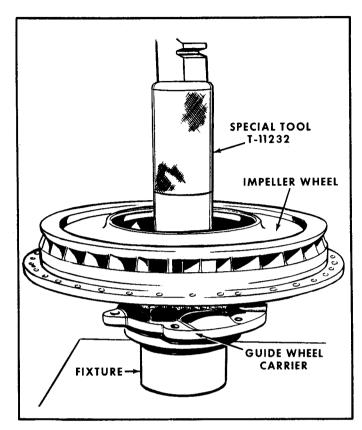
Installing Inner Race of Impeller Wheel Ball Bearing on the Guide Wheel Carrier with Special Tool T-11232.
